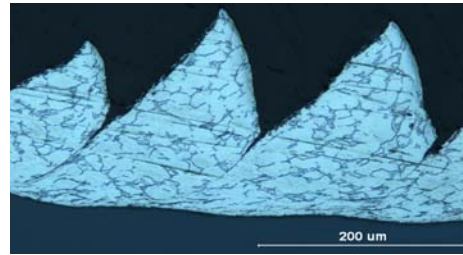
Section of chip formed by cutting the specimen at certain cutting conditions
